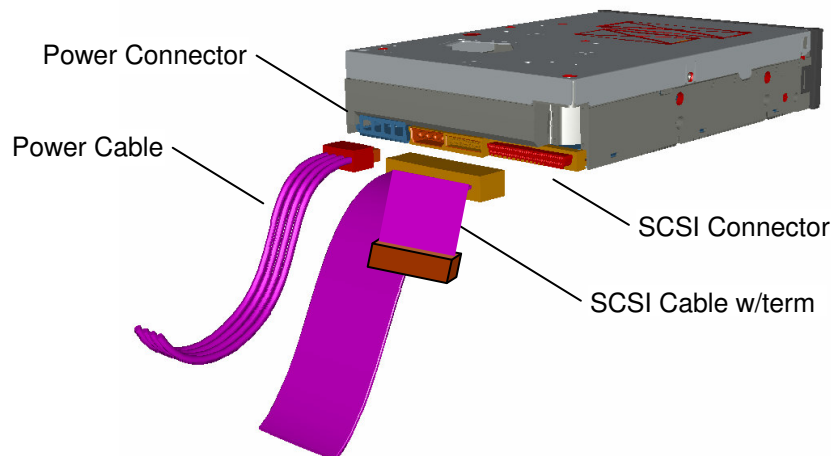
Connecting the cables to the Tandberg LTO HH tape drive
